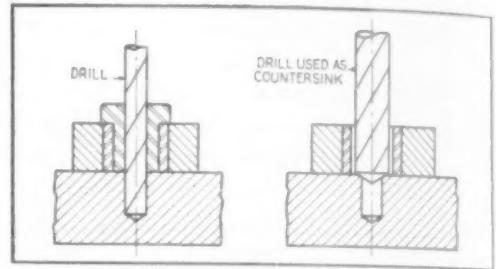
A drill can be used for counter-sinking without the bushing when tolerances permit.
